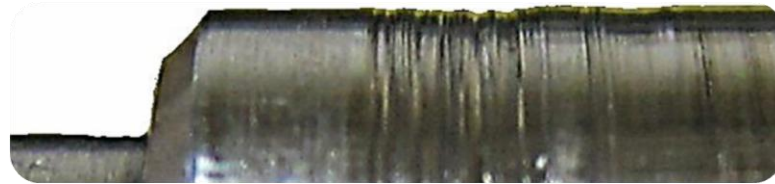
Extensive wear caused by a Teflon shaft seal on the original power takeoff shaft.
